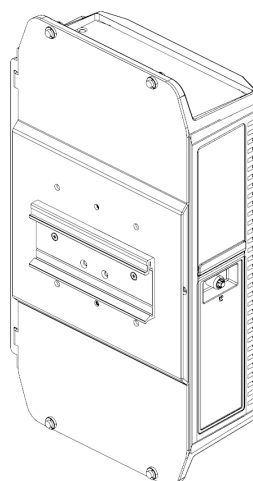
TREK-60 Wall and DIN Rail Mounting
